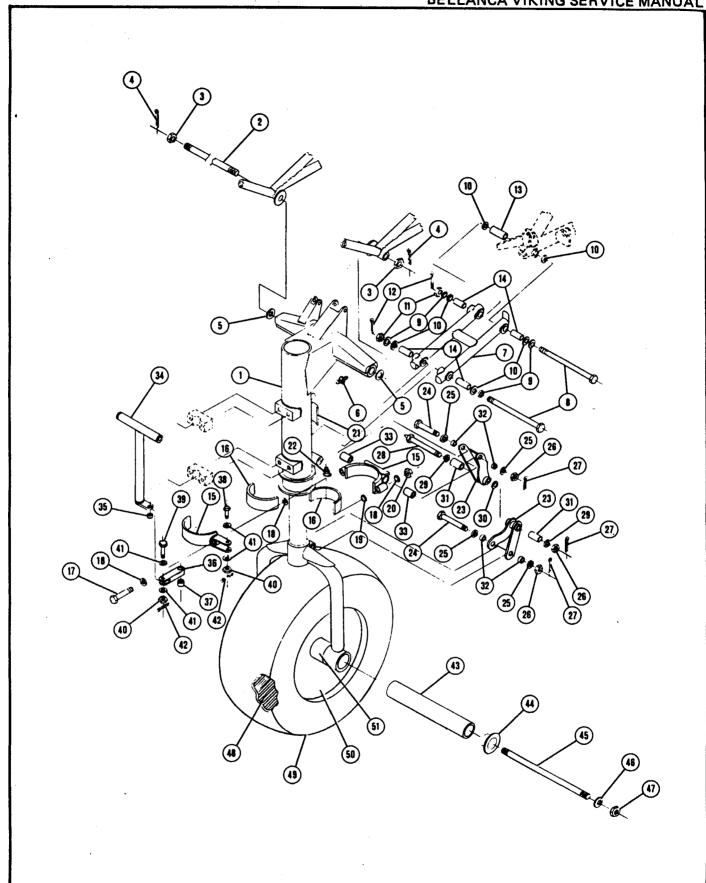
Nose Gear Installation, Aircraft Serial Numbers 76-30797 through Serial Numbers 78-30905.
